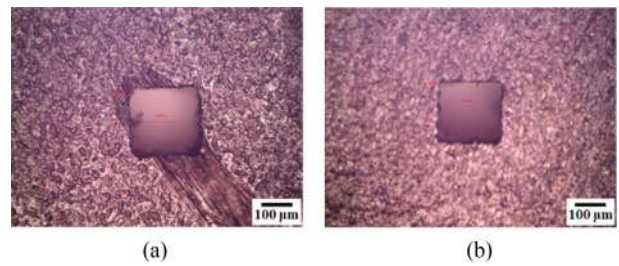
A square shape by hybrid machining with laser pre-processing (30% power and 5 repetitions) and EDM post-processing (100 V and 10 nF): (a) Front view, (b) Backside view
